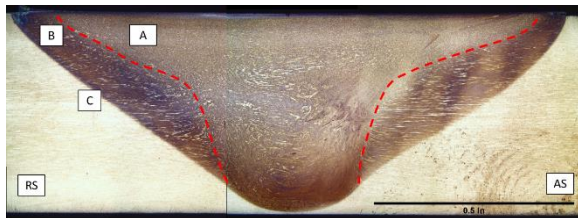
Cross section of development weld No. 3. This image depicts the first third of the weld where no defect was found.
